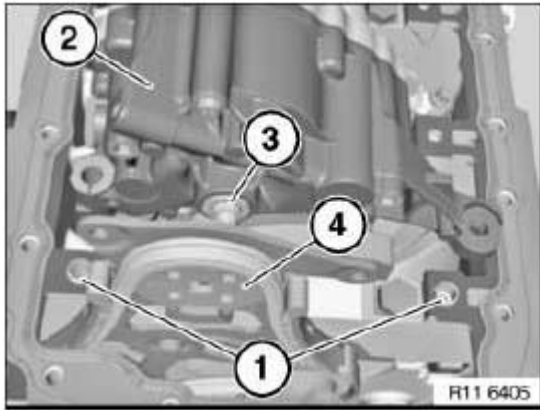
Identifying Spacer Bushings, Twin Surfaces And Oil Pump
